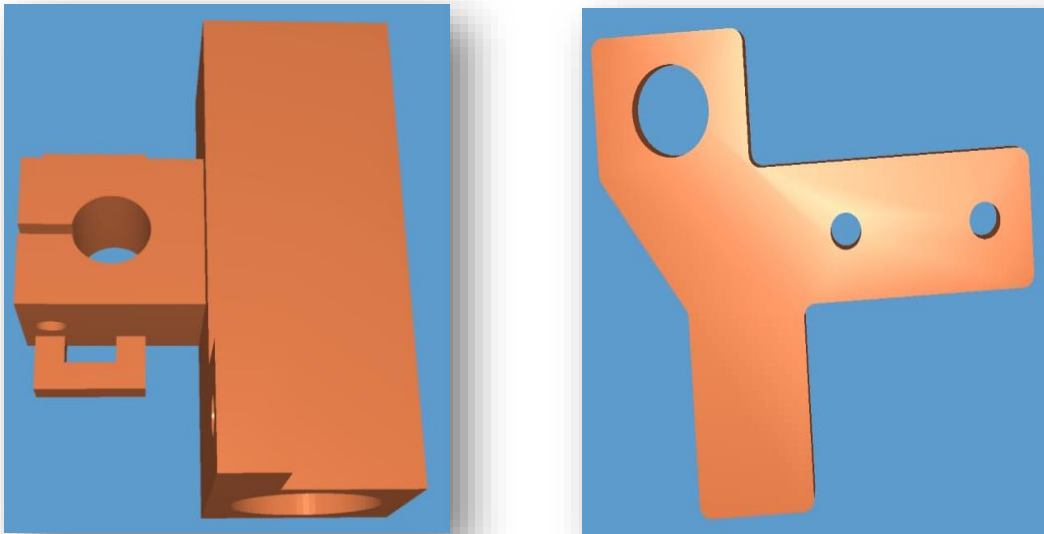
CADD diagrams of 3D Printed parts used in making of Two – Axis Computer Numerical Controlled Foam Cutting Machine
